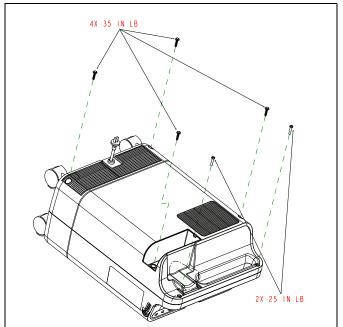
SCREW REMOVAL/INSTALLATION
